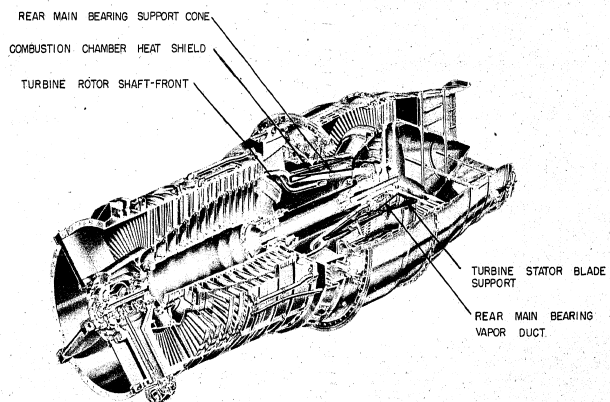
CUTAWAY VIEW OF THE CURTISS-WRIGHT J65 TURBOJET SHOWING THE TITANIUM PARTS AND ASSEMBLIES MANUFACTURED UNDER THIS PROGRAM.
